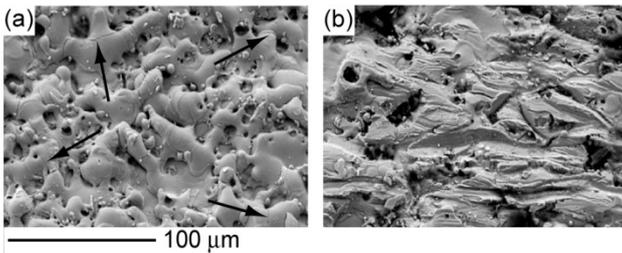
Machined surfaces from: (a) WEDM, (b) AWEDM.
